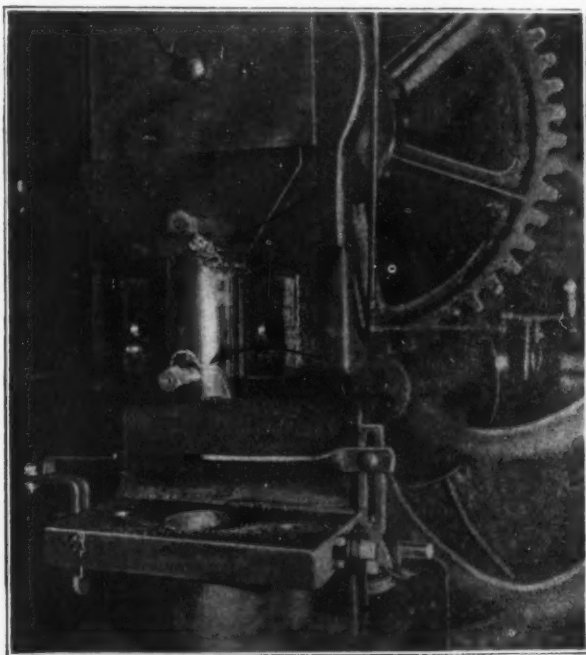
A Broken Press Ram Welded with an Oxy-Acetylene Blowpipe.
